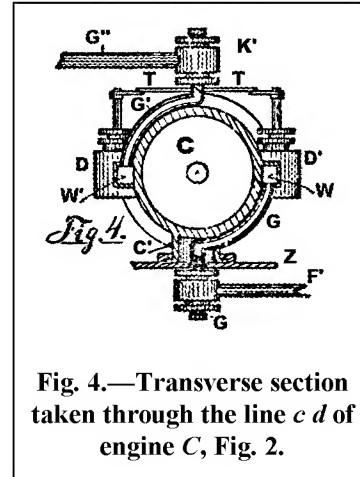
Transverse section taken through the line *c d* of engine *C*, Fig. 2.
